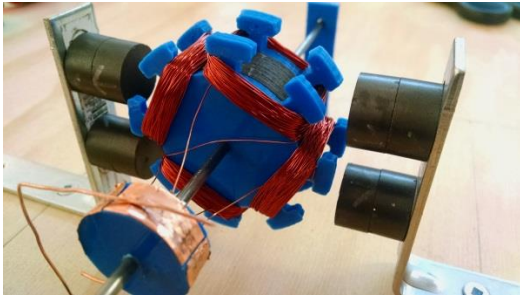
3D printed iron-impregnated PLA-based rotor for a DC motor
